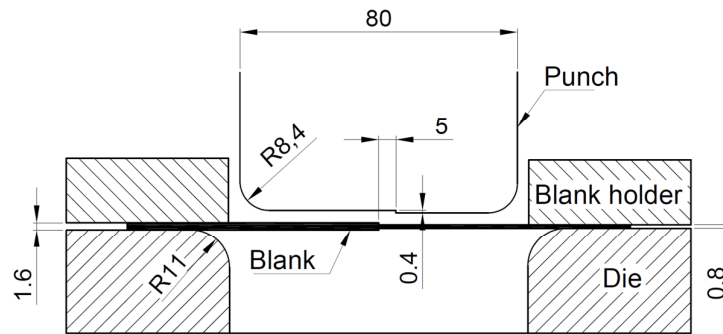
Forming tool geometry for drawing TWB with similar materials and non-uniform thickness.
